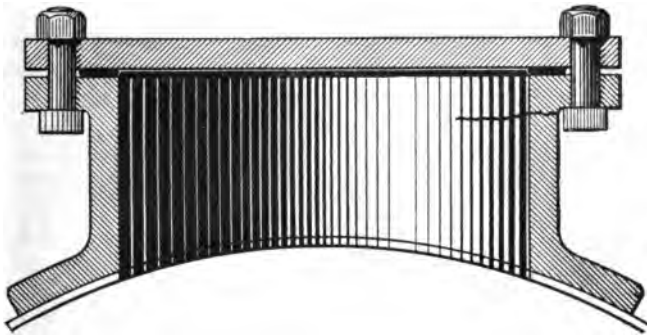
A CAST-IRON FLANGE WITHOUT BRACKETS.
